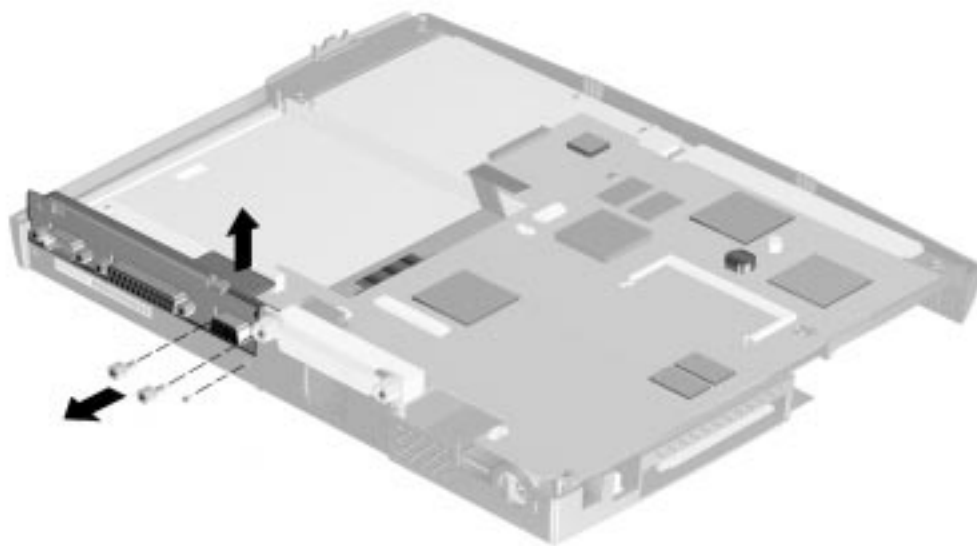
Removing the Screws from the I/O Fixture Connector
